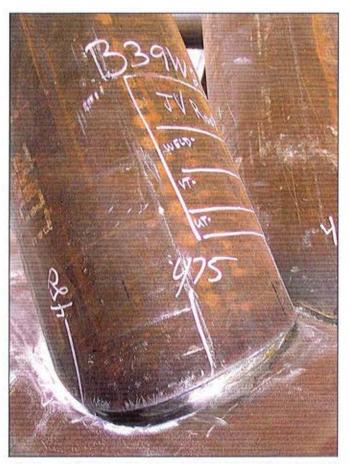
Typical root pass, ground and prepared for subsequent welding. Note marking of groove depth measurements and piece mark identification above check-box.
